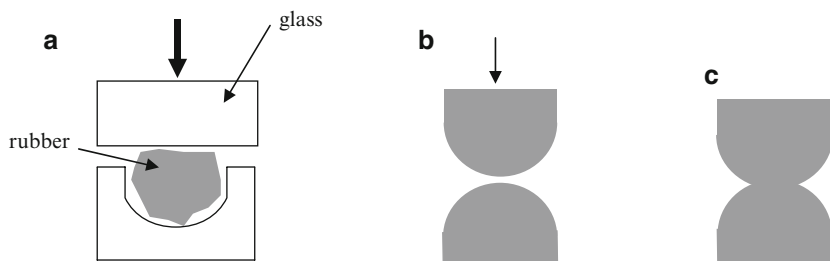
(a) Moulding rubber lenses in glass formers; (b) bringing two rubber lenses together; (c) spreading of rubber to form a large contact spot
